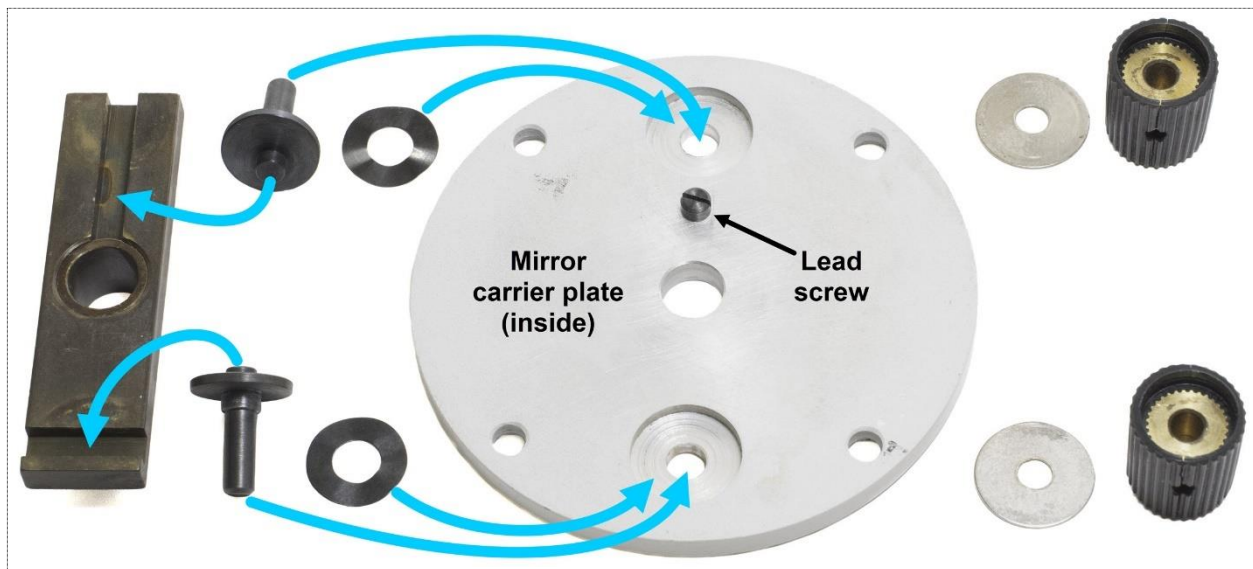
The mirror carrier plate with the disassembled mirror alignment mechanisms. The parts are (from left to right):
